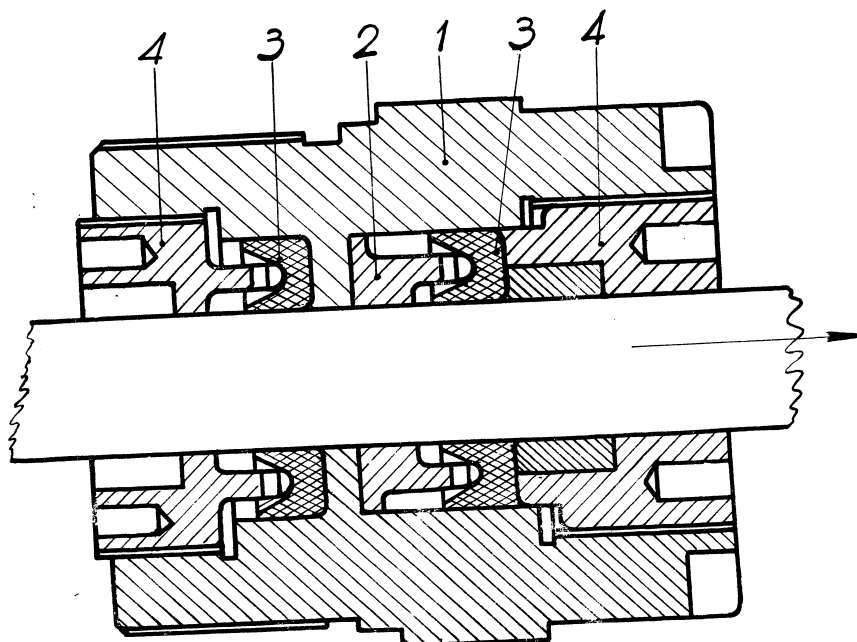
RECUPERATOR STUFFING BOX — ASSEMBLY
